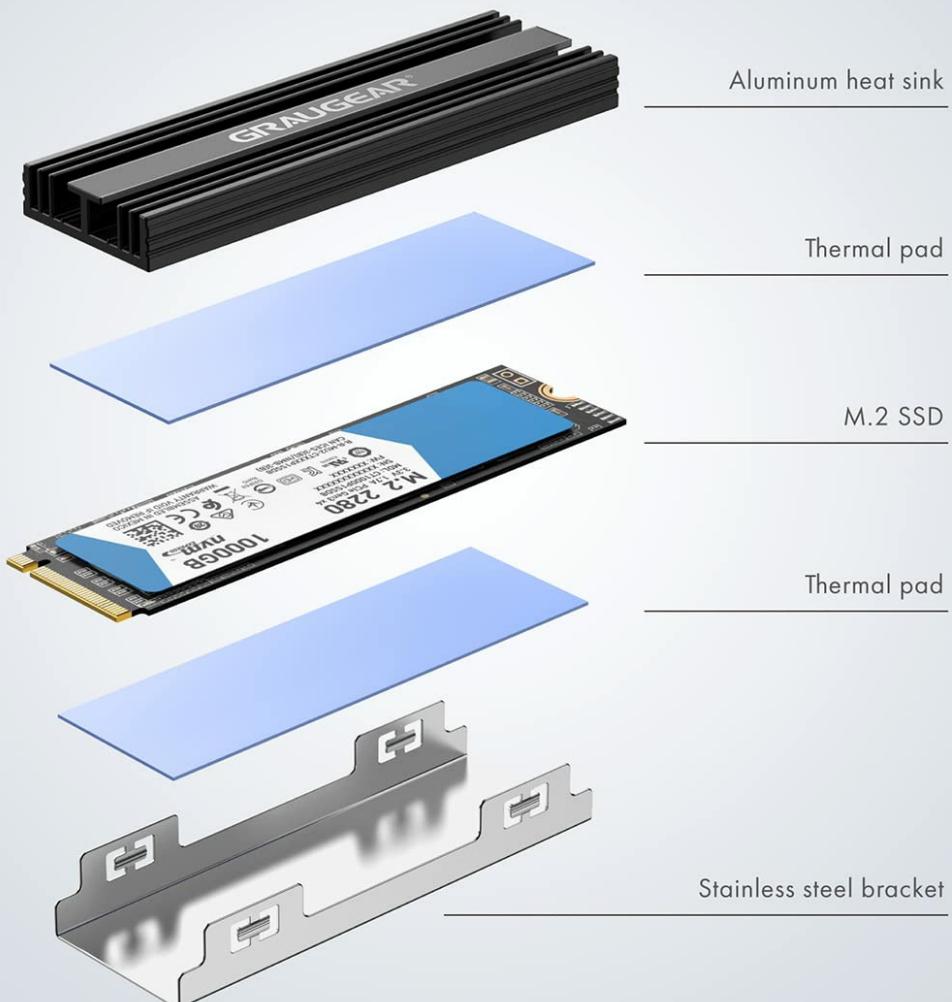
Exploded diagram showing the assembly order of the heatsink, thermal pads, and M.2 SSD.
